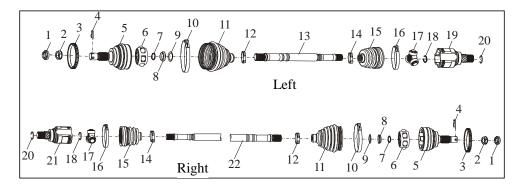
Exploded View of TRIEC1.6L Engine Axle Shaft
